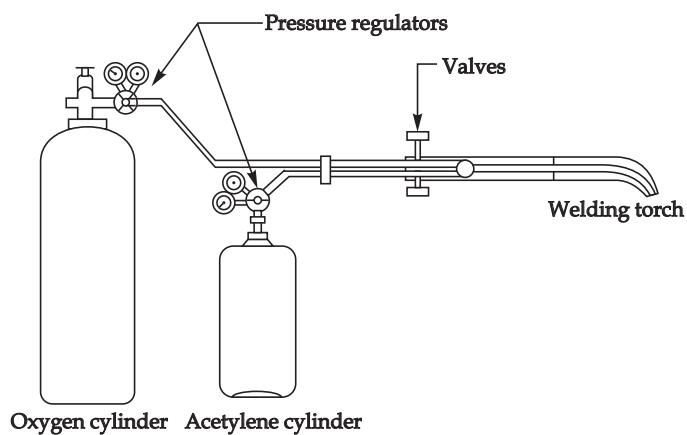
Oxyacetylene welding welding set.
